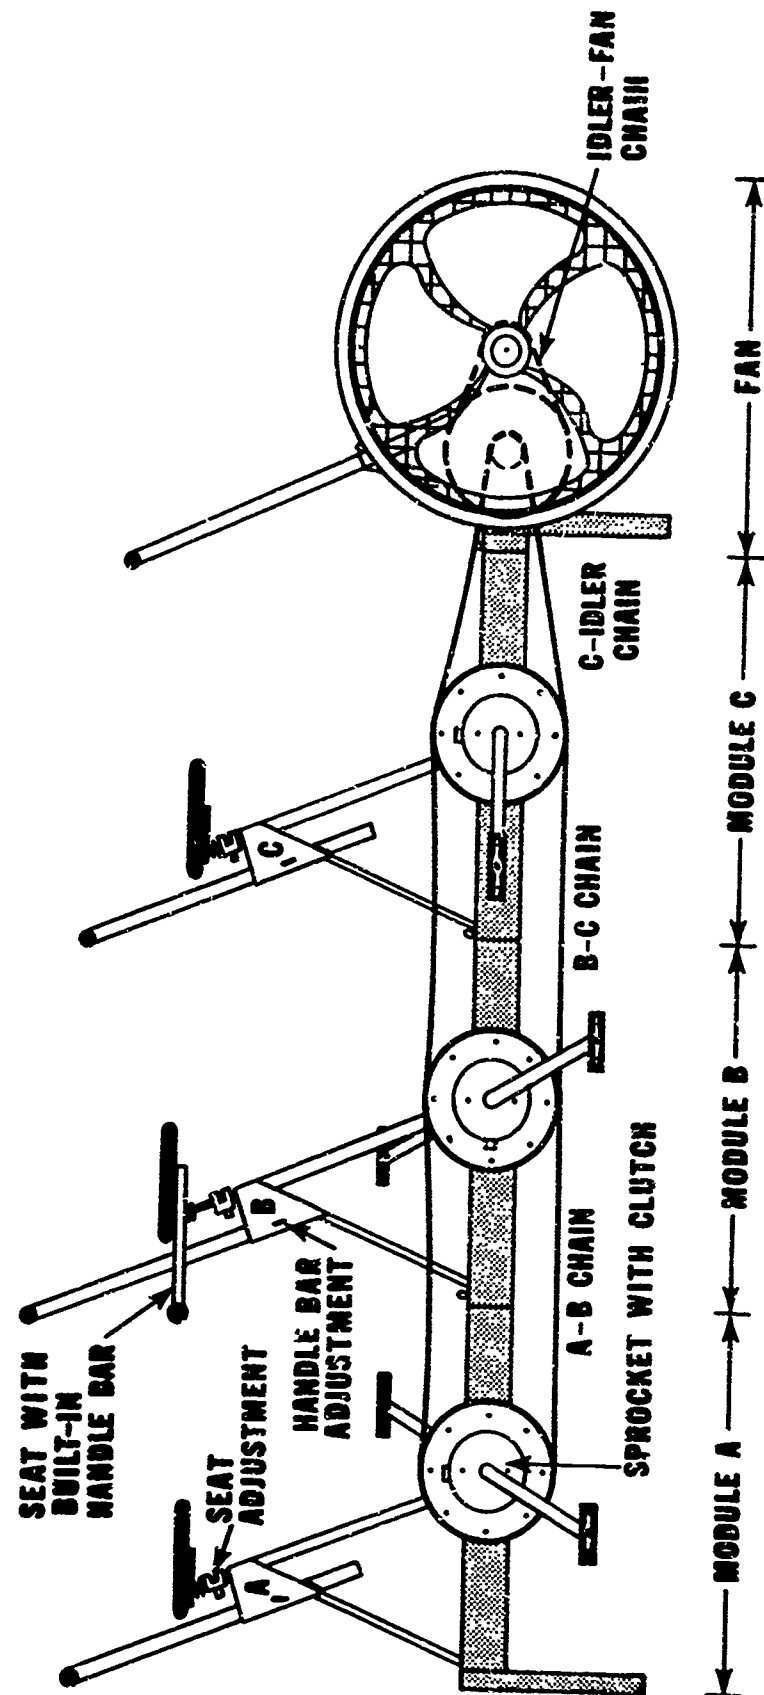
SHELTER VENTILATING UNIT -- SIDE VIEW
